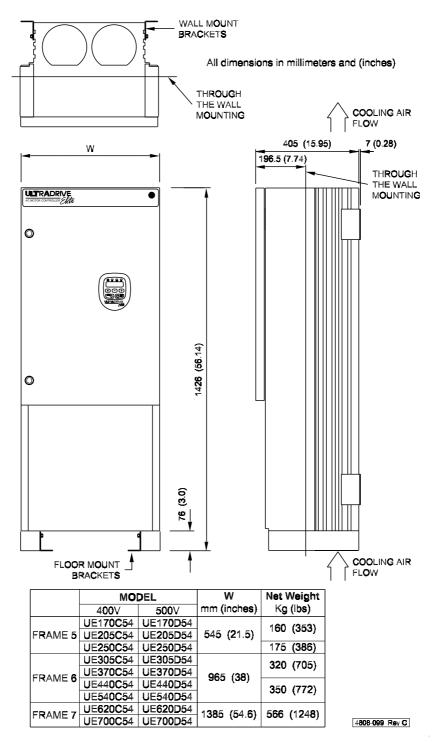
Ultradrive Elite Frames 5 to 7 Dimensions
